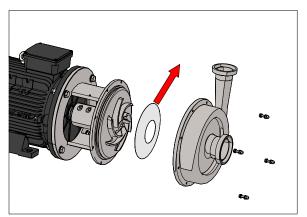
Remove casing and spacer ring tool [13-MT].
